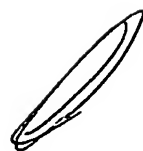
is a three dimensional view of the tubular member with receptacle member.
